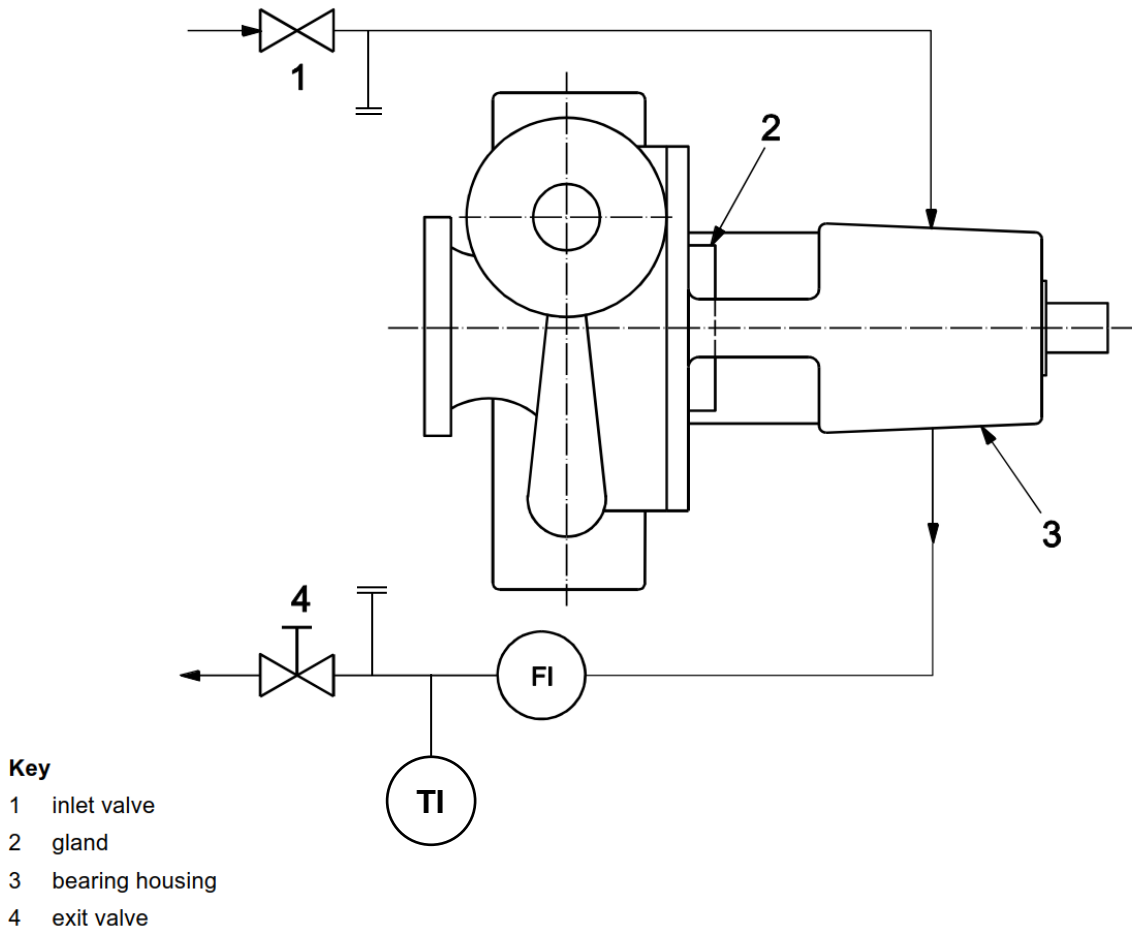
Piping for overhung pumps — Plan A, cooling to bearing housing
